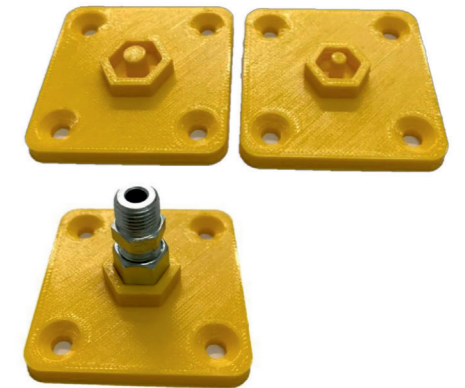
Screws and nuts assembly aid (left: 6mm, right: 4mm)
